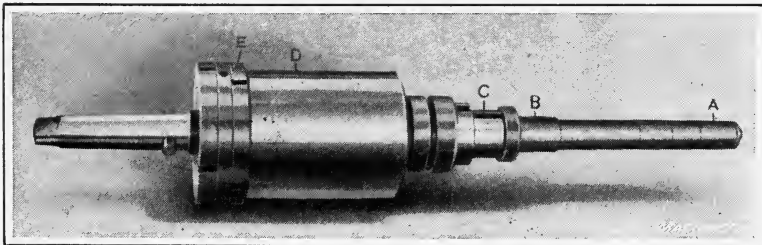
Boring-bar disassembled from the Jig illustrated in Fig. 21
